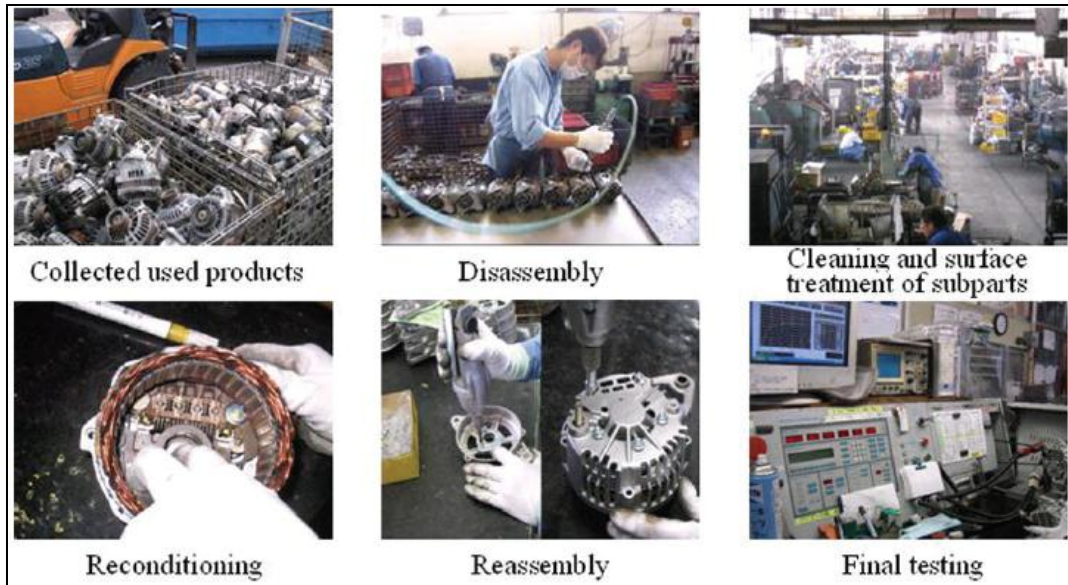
Phase in the Engine Remanufacturing Process with Pictures [5]
